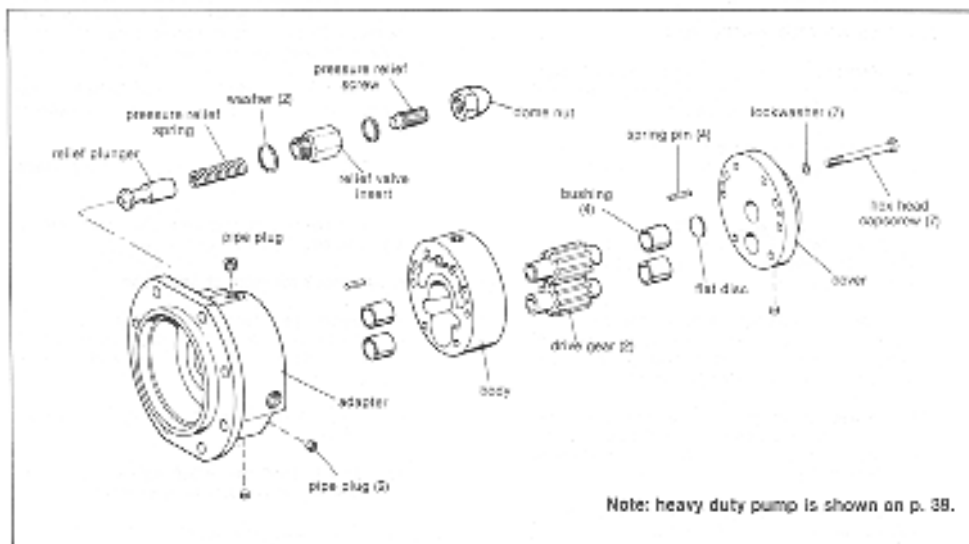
Oil Pump Assembly (Pump no. 1-13041-1000 shown)
